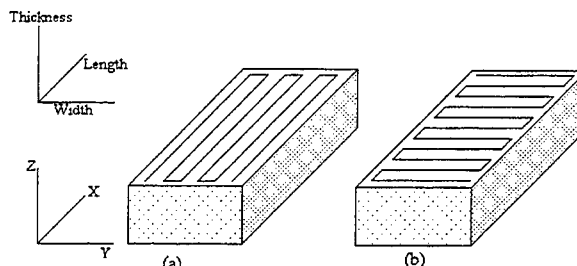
Fill patterns used a) 0° fill and b) 90° fill
